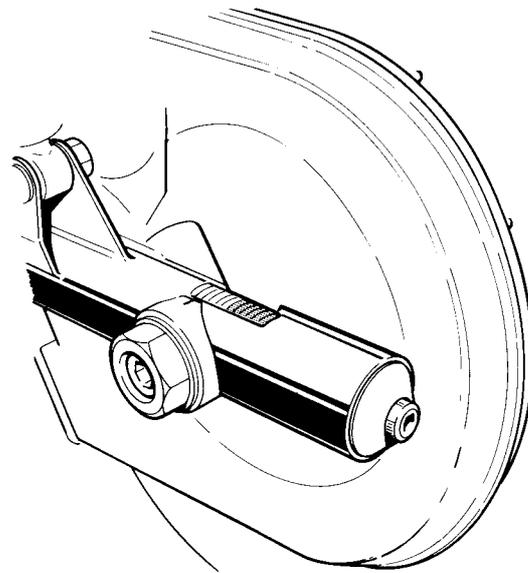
Maintaining the Rear Wheel Spindle Adjustment
